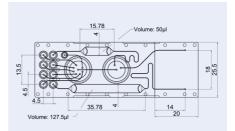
Detailed schematic drawing of large sensor integration area platform II - Fluidic 1012
